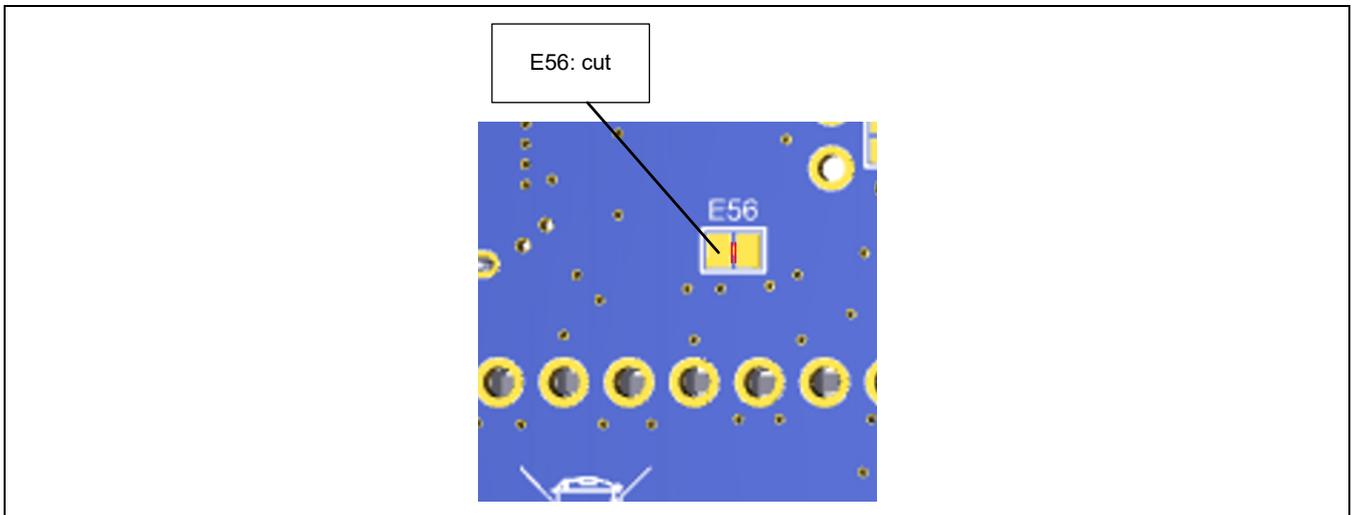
Position of Jumper Trace Cut E56 (Soldered Side)
